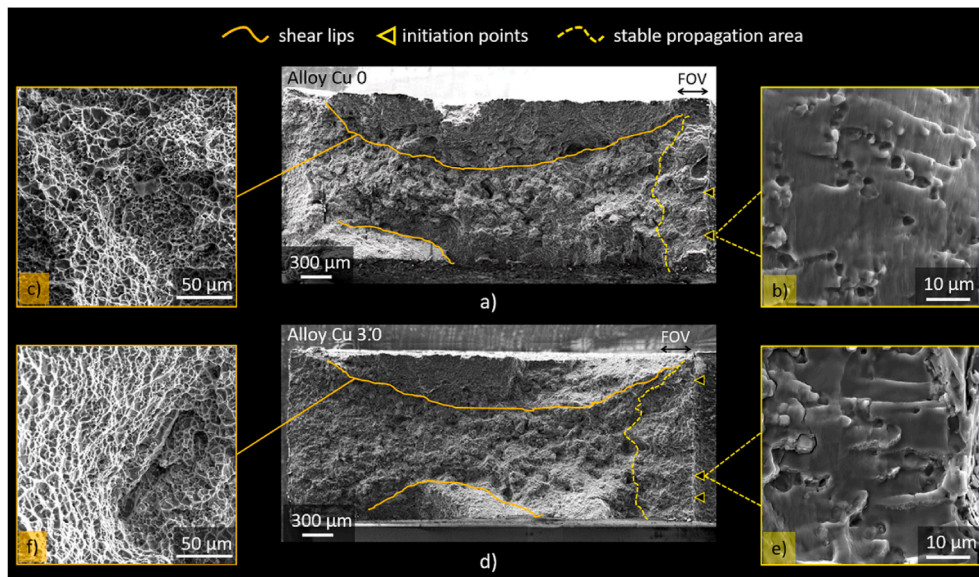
Fracture surfaces of heat-treated Compact-Tension (CT) samples: a) Alloy Cu 0, b) and c) are magnified views of initiation points and shear lips, respectively, in a); d) Alloy Cu 3.0, e) and f) are magnified views of initiation points and shear lips, respectively, in d).
